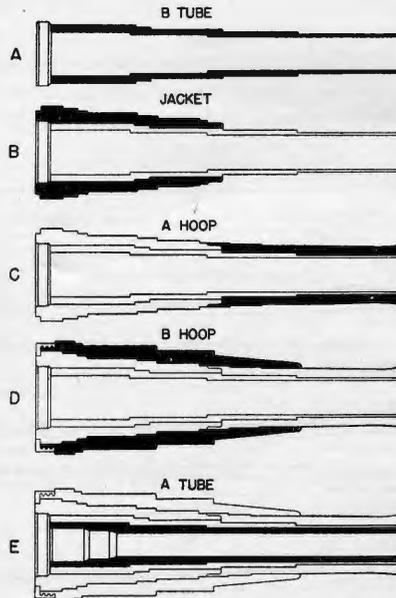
Order of assembly, built-up cannon, 16-inch howitzer, M1920.
